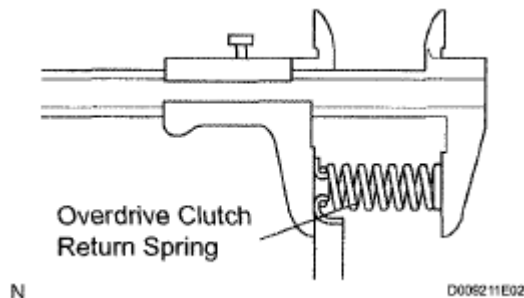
Measuring Free Length Of Overdrive Clutch Return Spring
